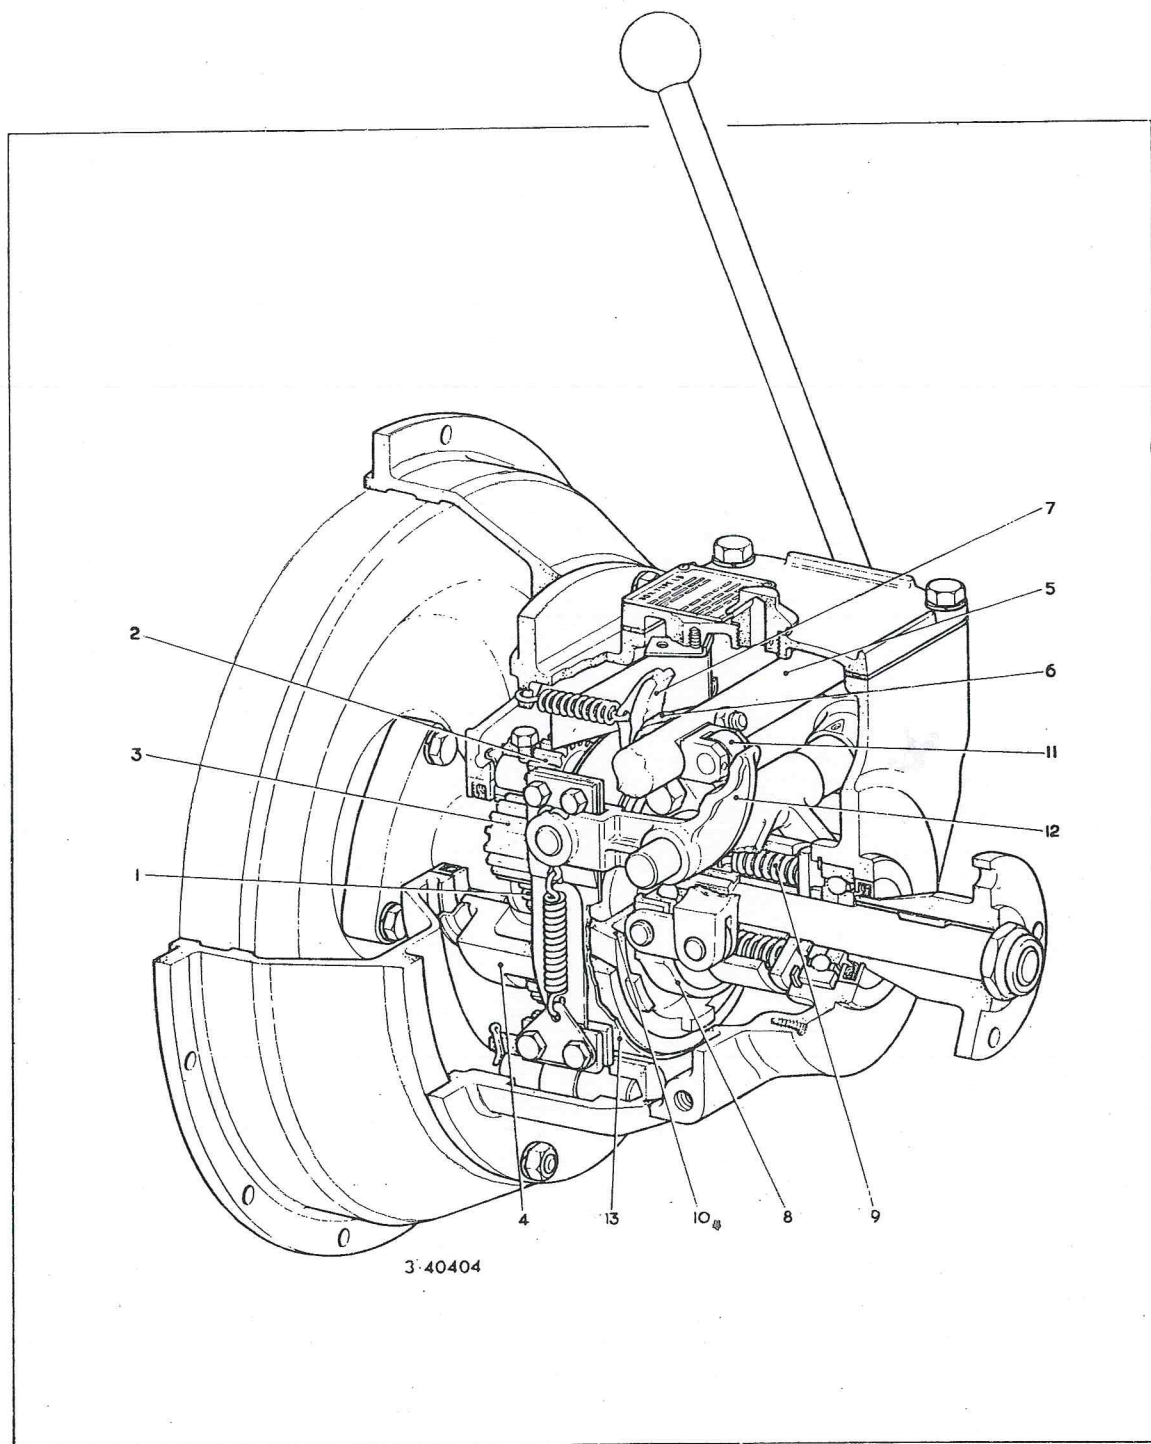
LISTER REVERSE GEAR—Manually Operated
